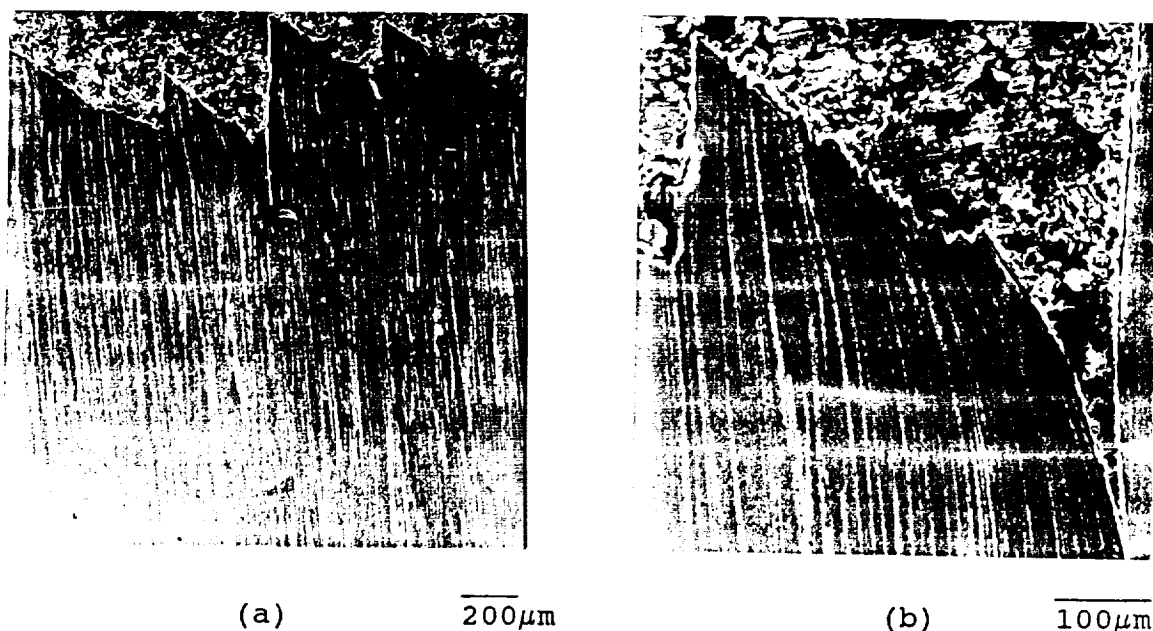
Cross section of AA 8009 CT specimen fracture surface indicating ligament necking in between delaminations.
